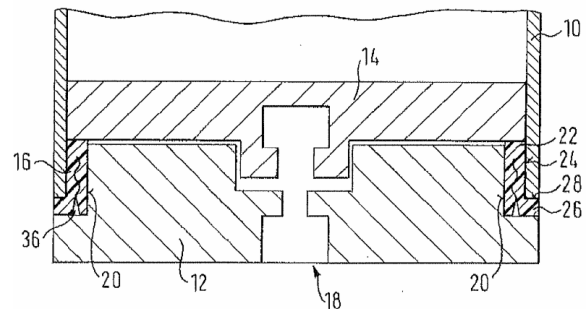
Illustration according Fig. 2 with compressed sealing element. Key to Fig. 2 to Fig. 5: 10 – Housing; 12 – End cap; 14 – Counter-pressure disk; 16 – Sealing element; 18 – Area; 20 – Contact surface; 22 – Longer leg; 24 – Sealing surface; 26 – Shorter leg; 28 – Contact surface; 30, 32 – Surface; 34 – Gap; 36 – Slot; 38 – Cable feedthrough; 40 – Central through hole; 42 – Central through hole; 44 – Closure element; 46 – End surface; 48 – Hexagon recess; 50 – Pin; 52 – Sleeve; 54 – Helical spring; 56 – Actuating pins; 58 – Cam plate
